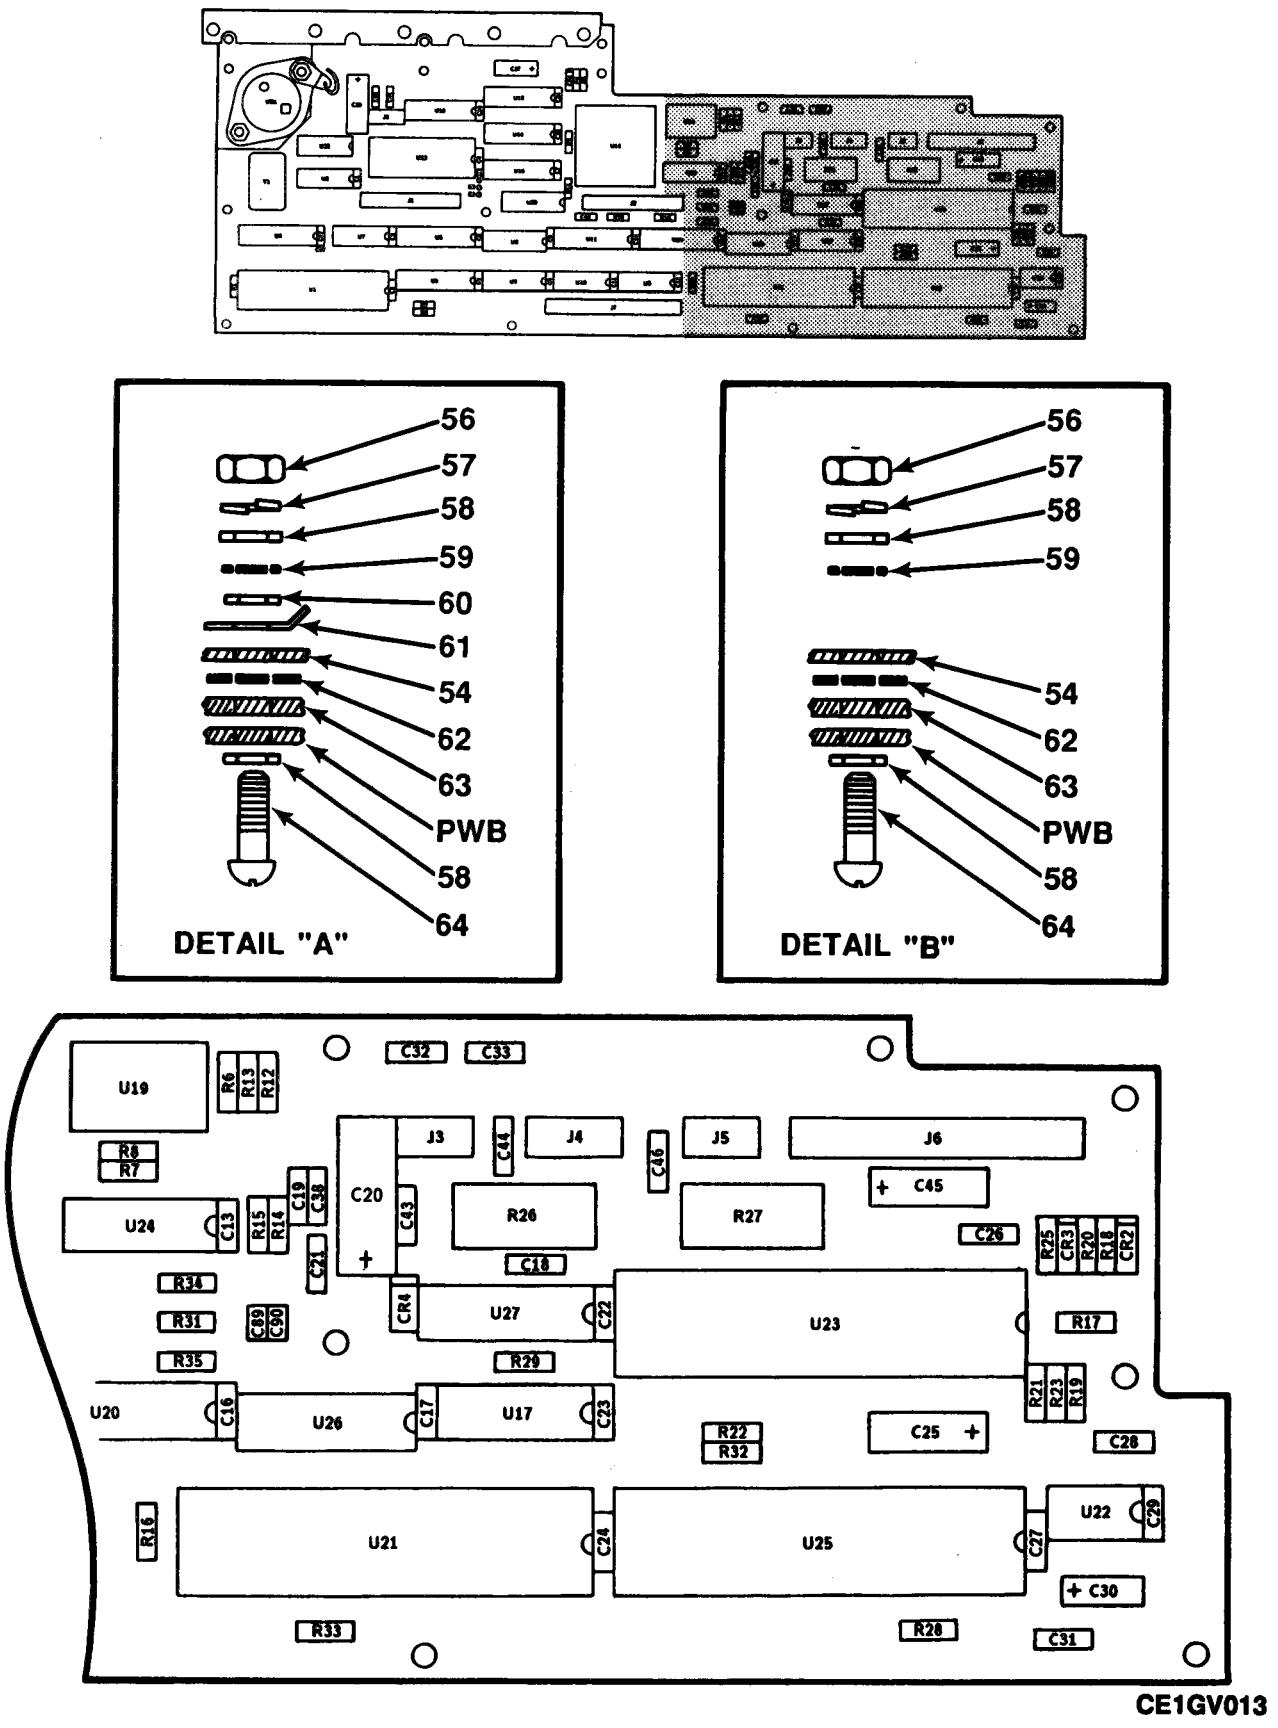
Circuit Card Assembly, Auxiliary Memory / Relay Control (3A2A3) (Sheet 2 of 3).
